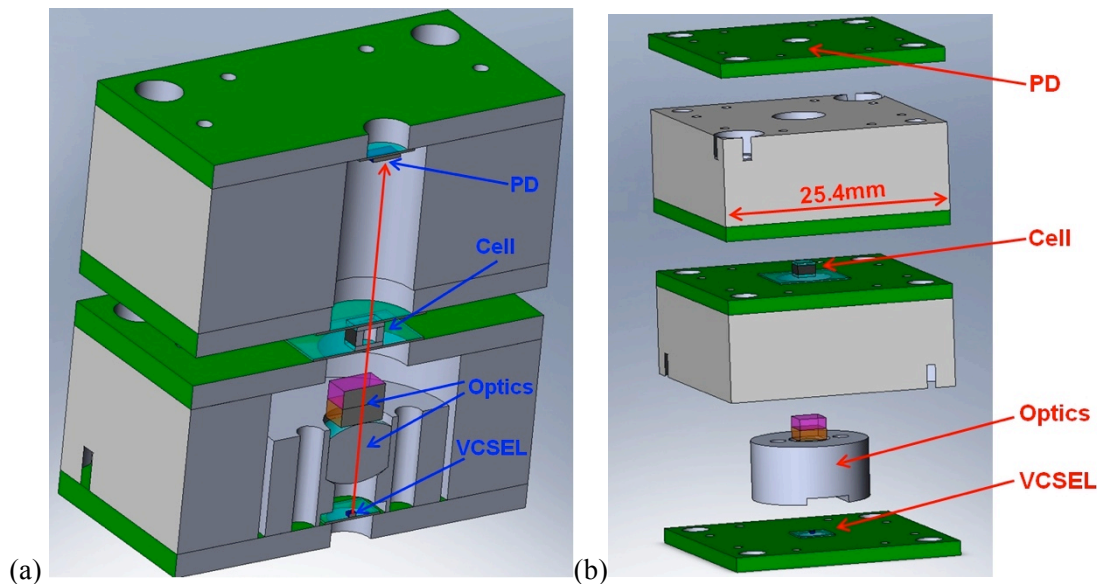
(a) Cross sectional view of the physics package 3-D CAD model. (b) Exploded view of the physics package 3-D CAD model.
